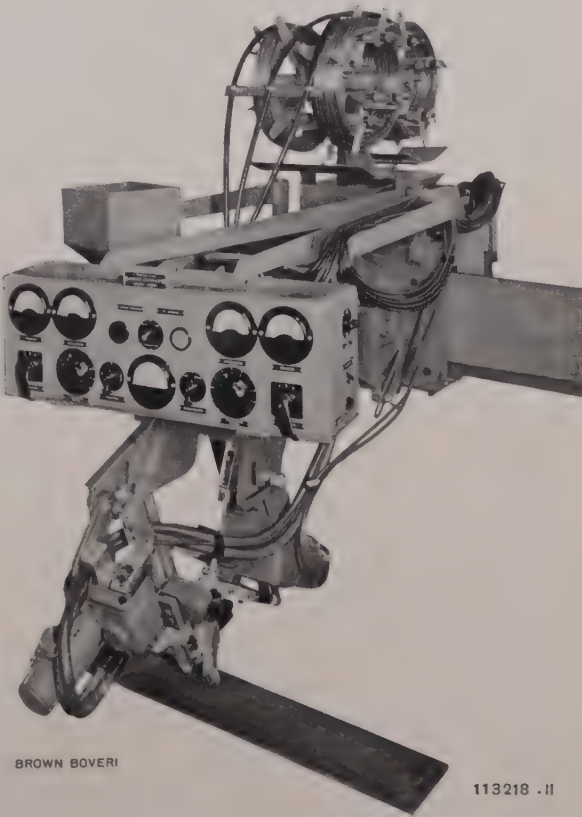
Among the welding problems increasingly encountered lately is the application of stainless or heat-resistant material to ordinary steel by surfacing
